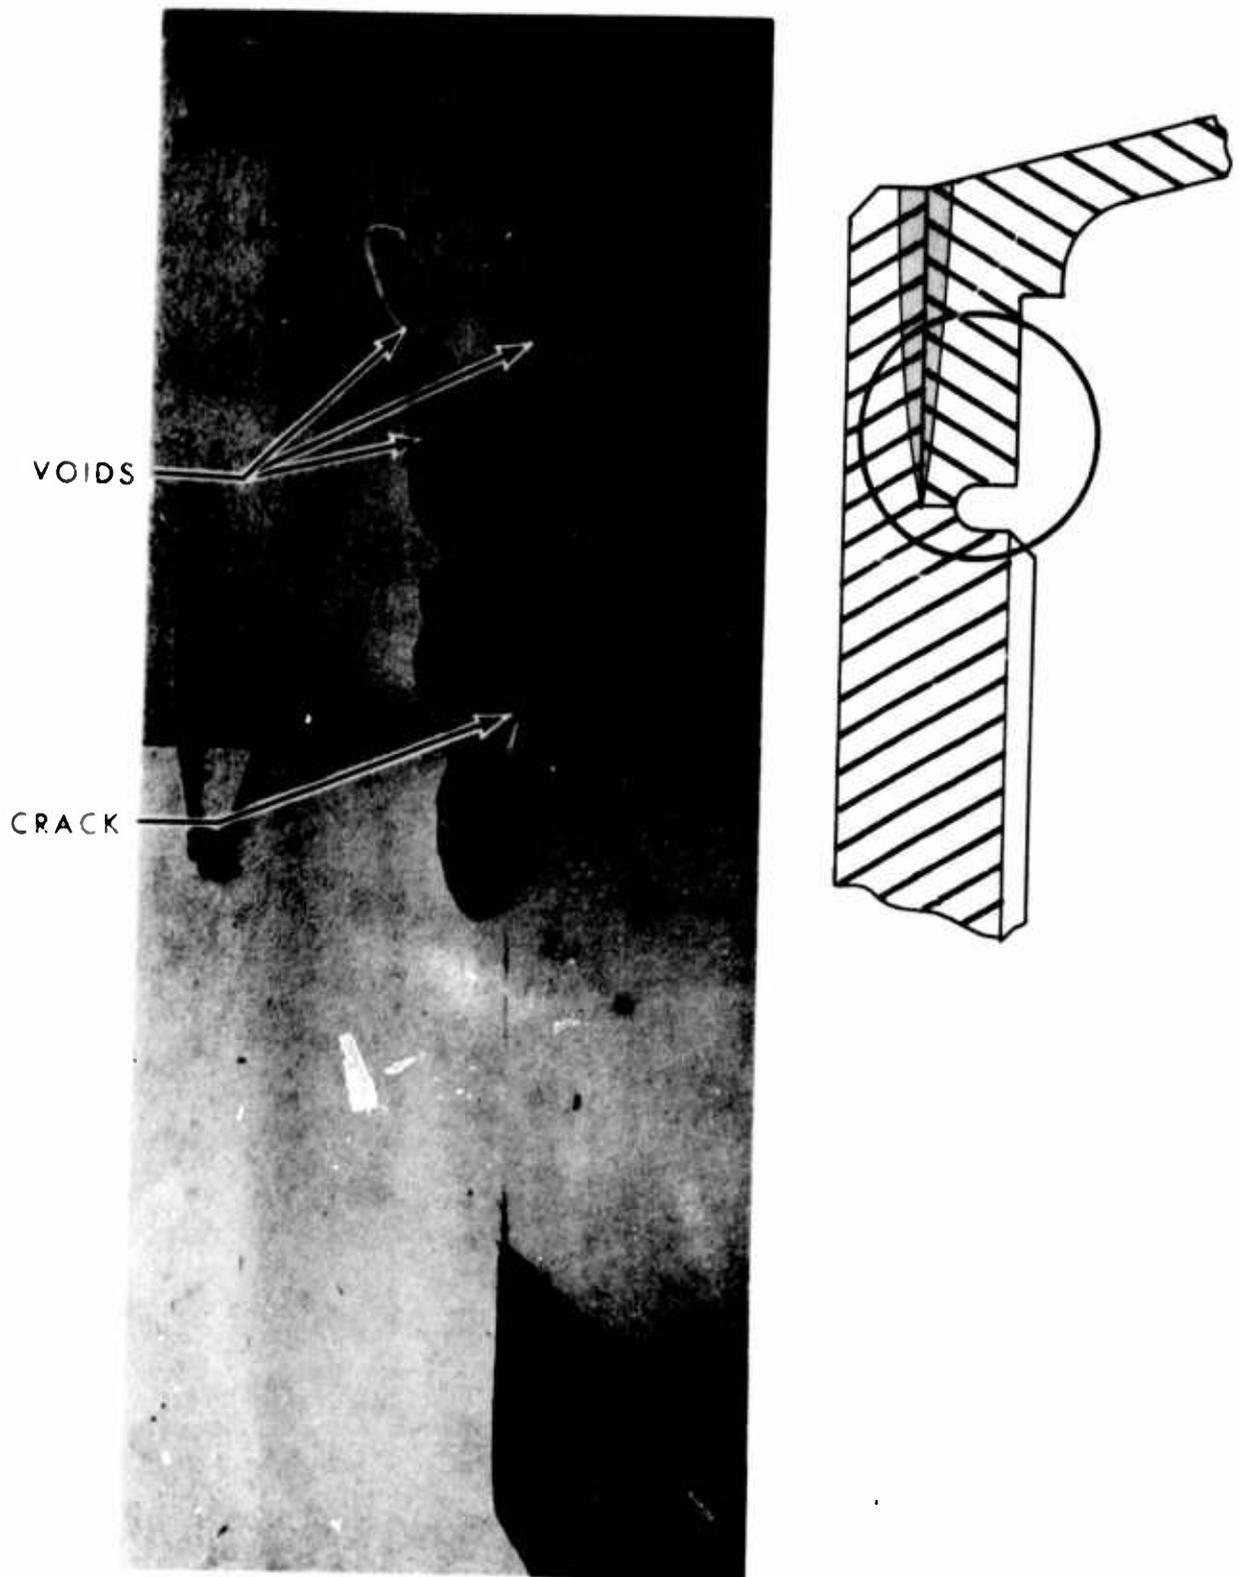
Metallographic Inspection of First-Row Pinions Revealing Voids at Weld Line.
